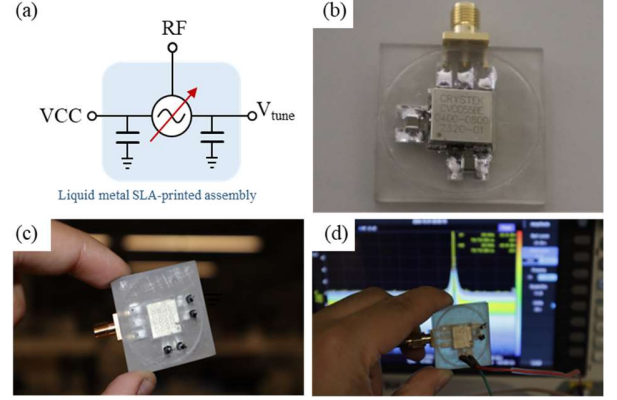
VCO circuit with liquid metal interconnects: (a) schematic; (b) assembled unpackaged circuit; (c) sealed VCO circuit; (d) measurement setup.
